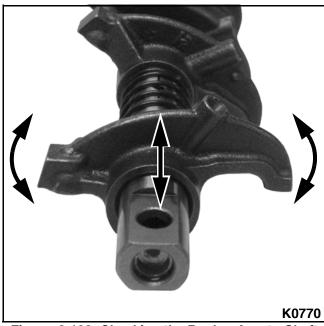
Checking the Rocker Arm-to-Shaft Clearance
